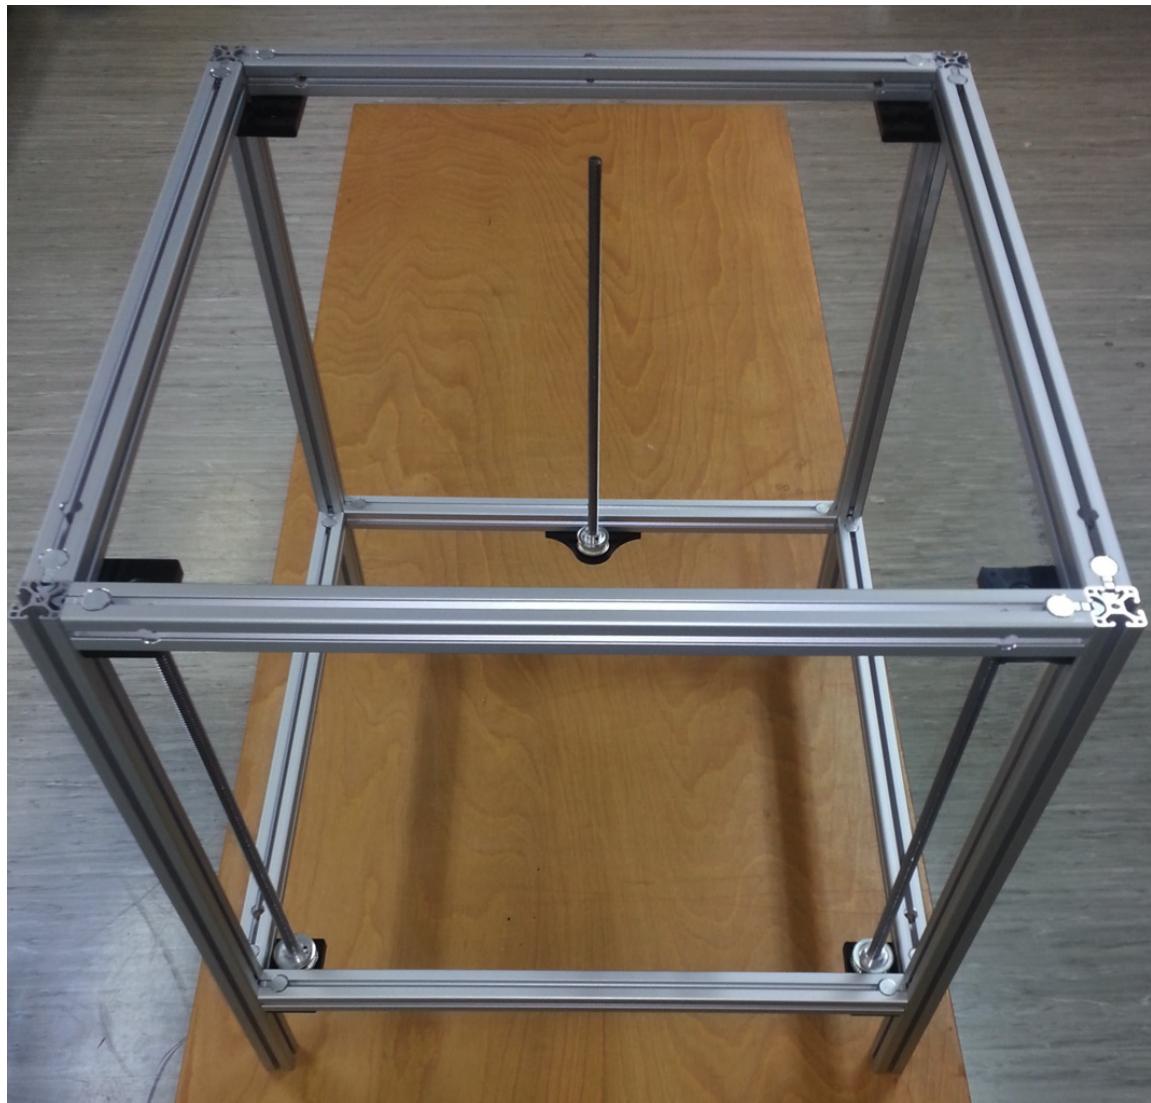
Details Securing the trapezoidal rod spindles
